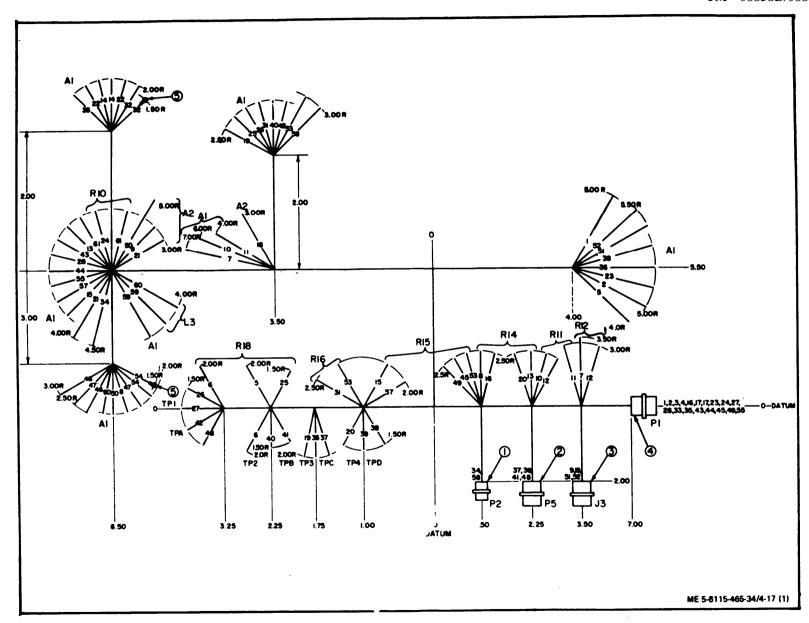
400 Hz Governor Control Unit Wiring Harness, Drawing No. 69-814 ( Sheet 1 of 2)
